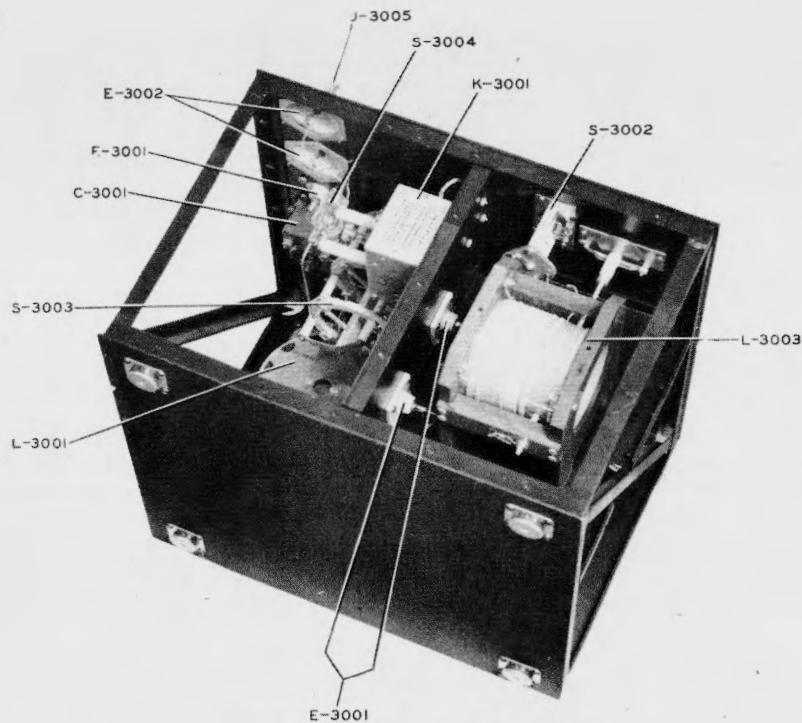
Navy Type COL-47505 Antenna Loading Coil Unit - Top Open View
